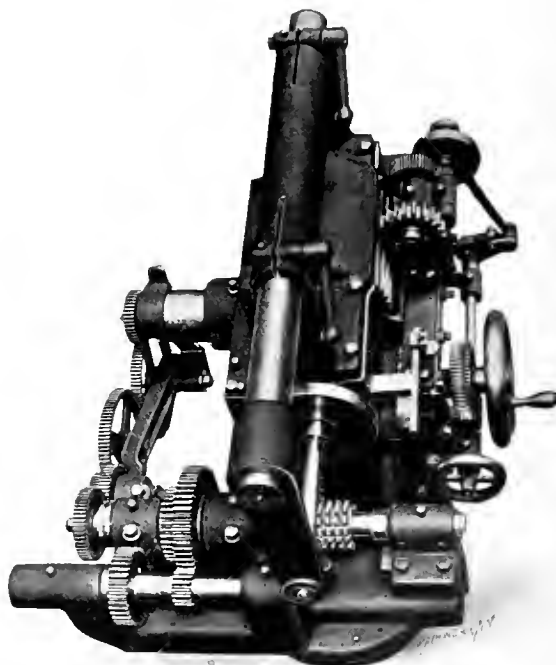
Top View, showing Back-gear Spindle Drive, Automatic Feed, etc.
